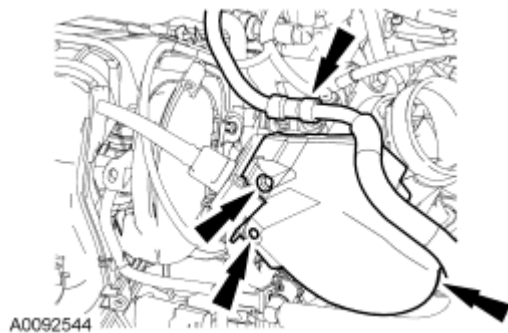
Locating Accelerator Snow Shield, Screw And Pin-Type Retainers
